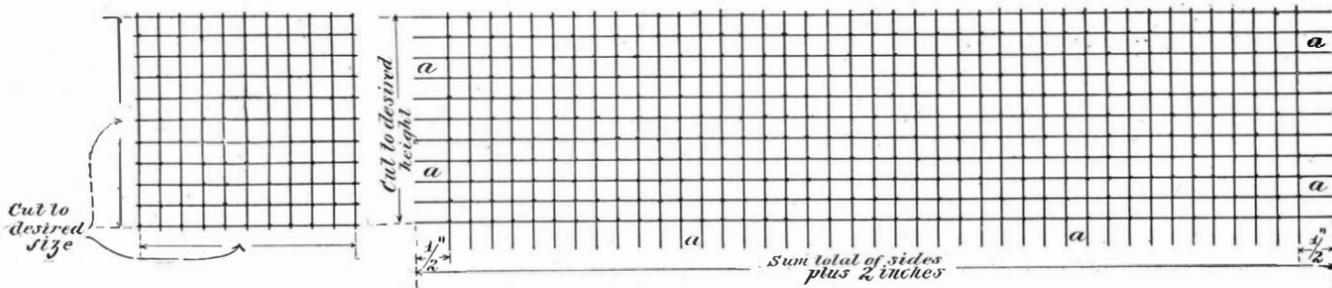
SIDE AND BOTTOM PIECES FOR RECTANGULAR JAR.
